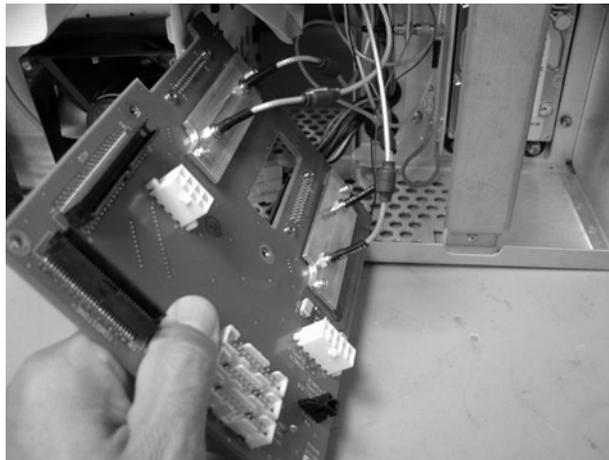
Pulling Out the A6 Distribution Assembly Board
